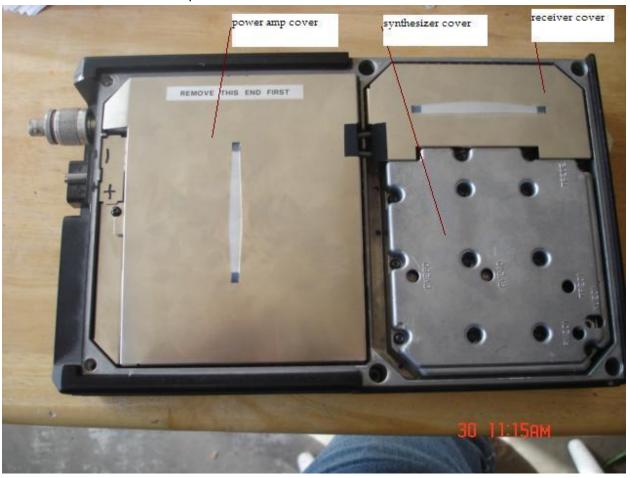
remove the Shield on the left side that is over the power amplifier board.
